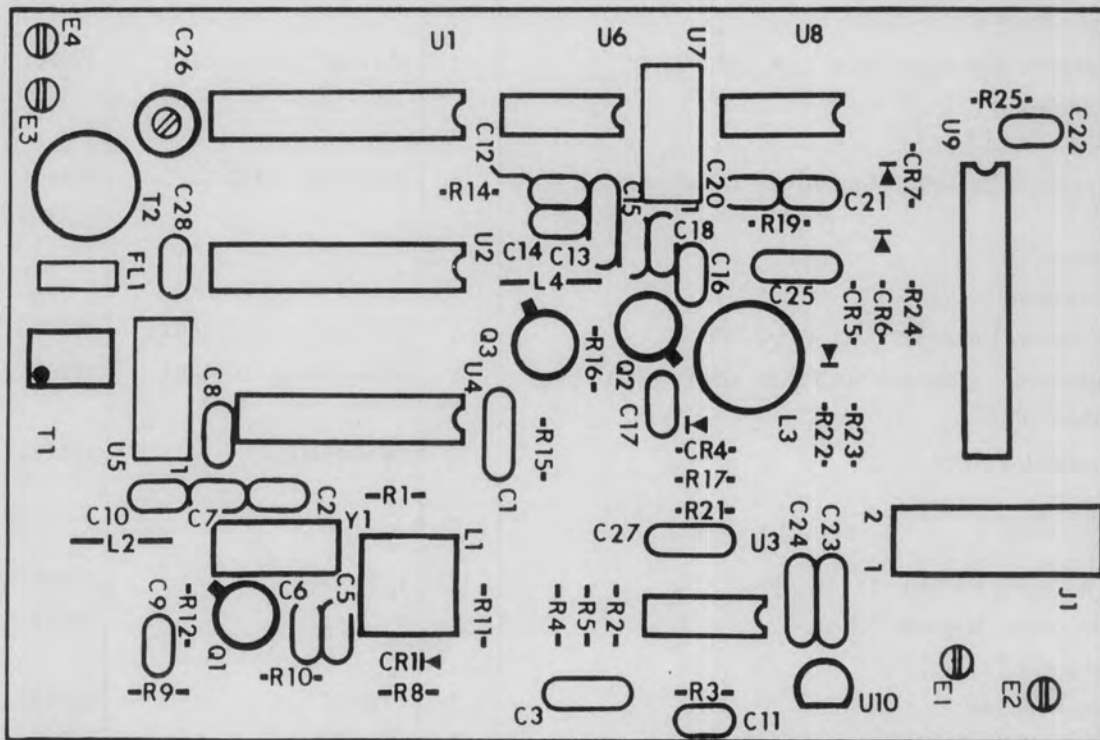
Type 371165-1 BFO Assembly (A3A7), Location of Components
